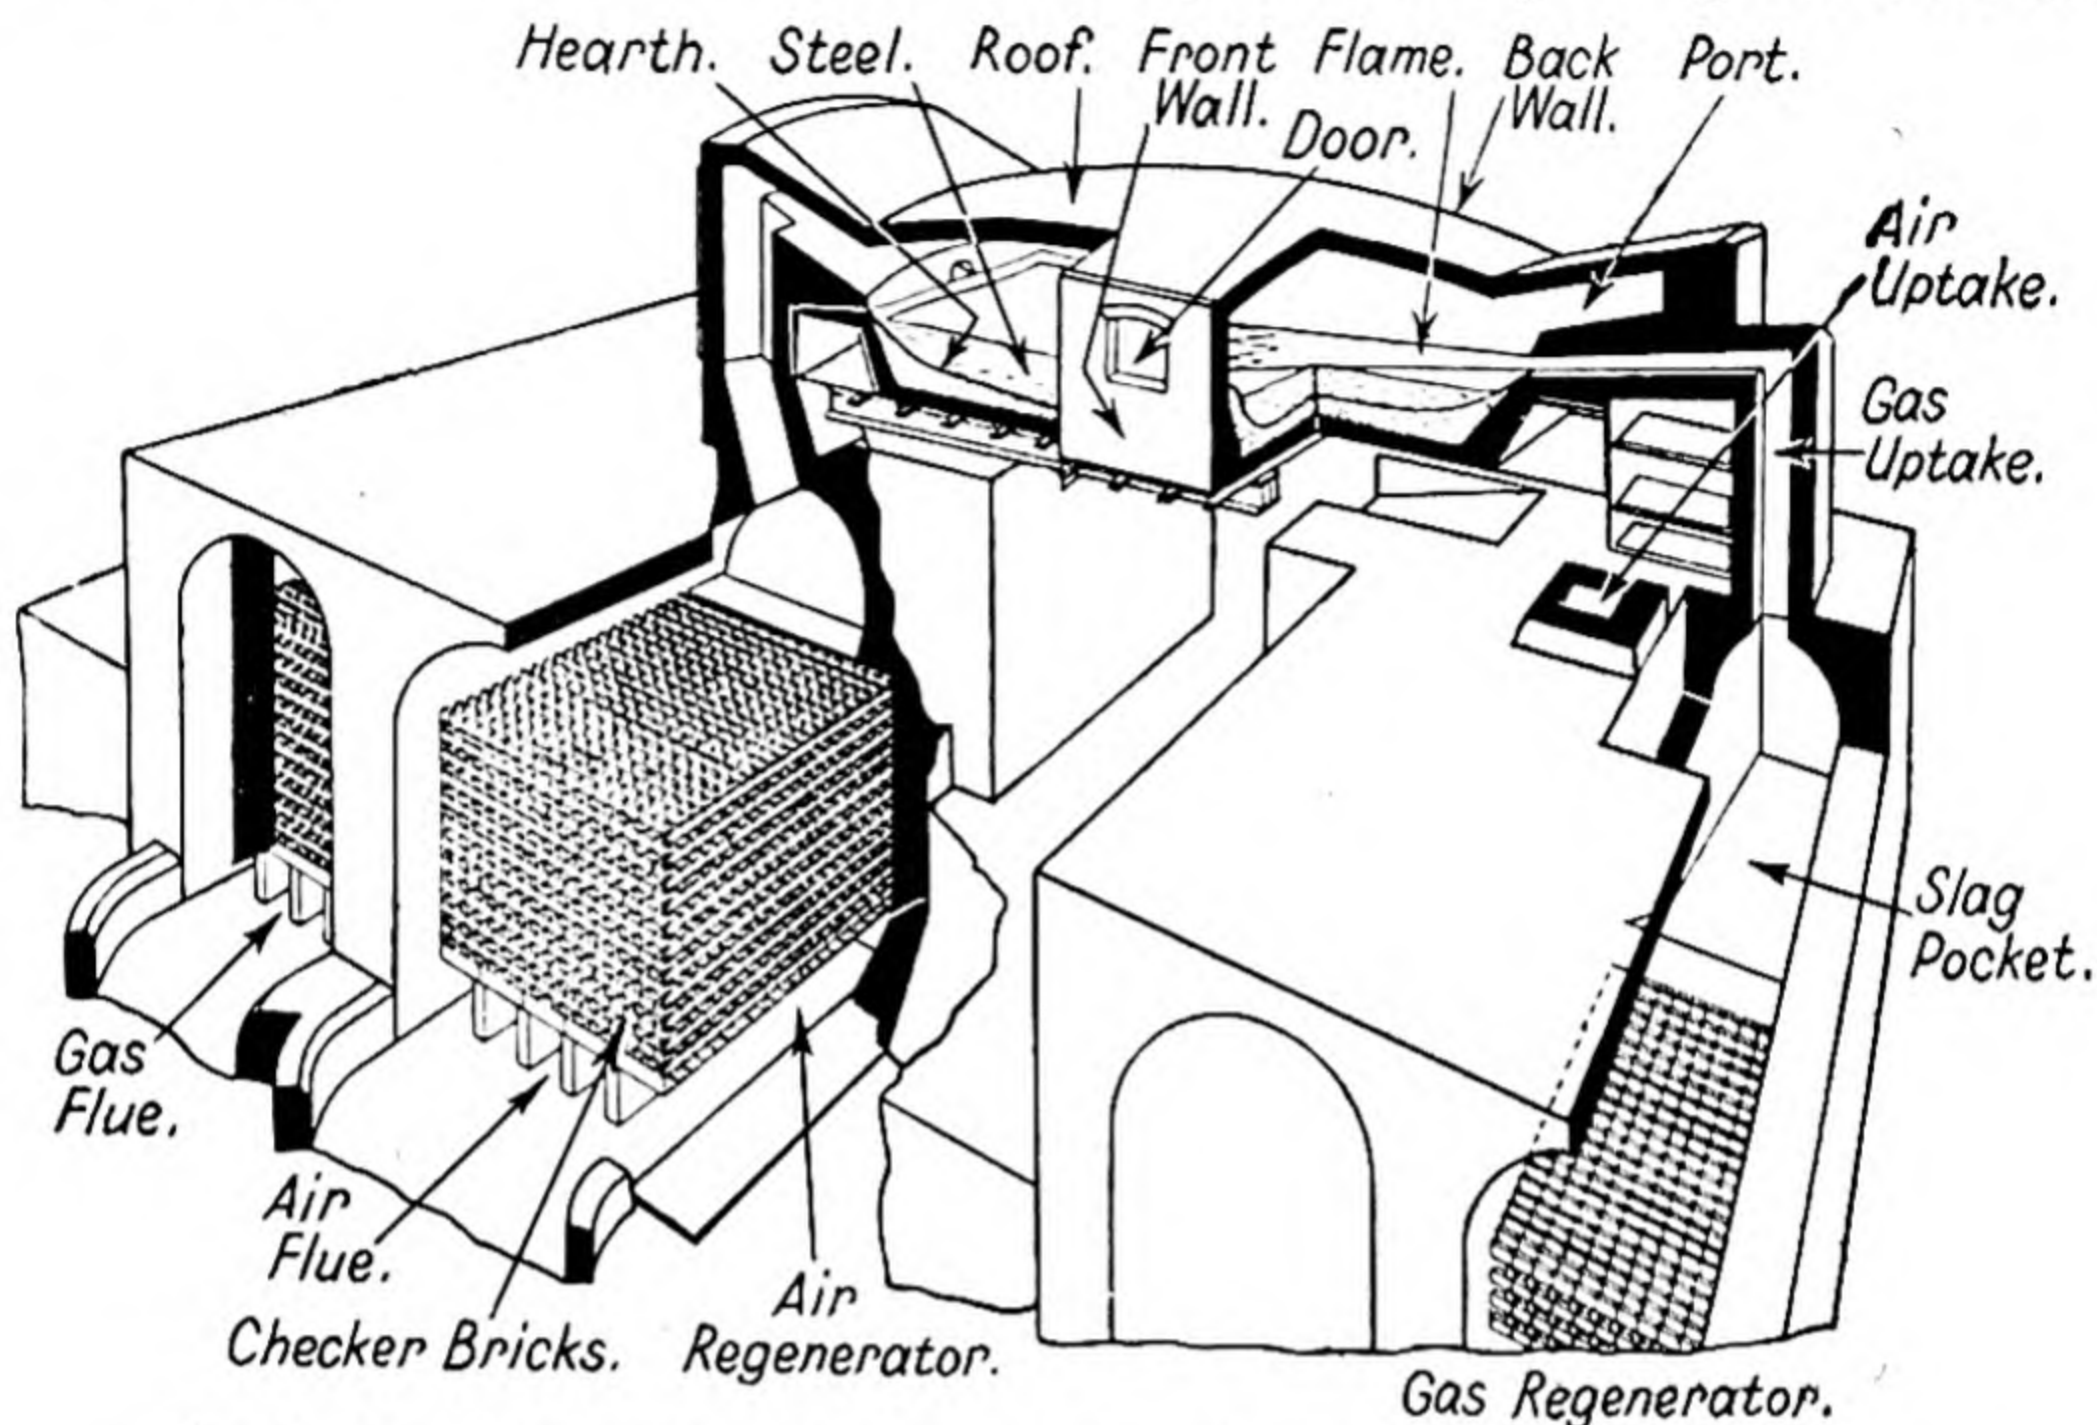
Imaginary section through open-hearth furnace. Steelwork removed.
